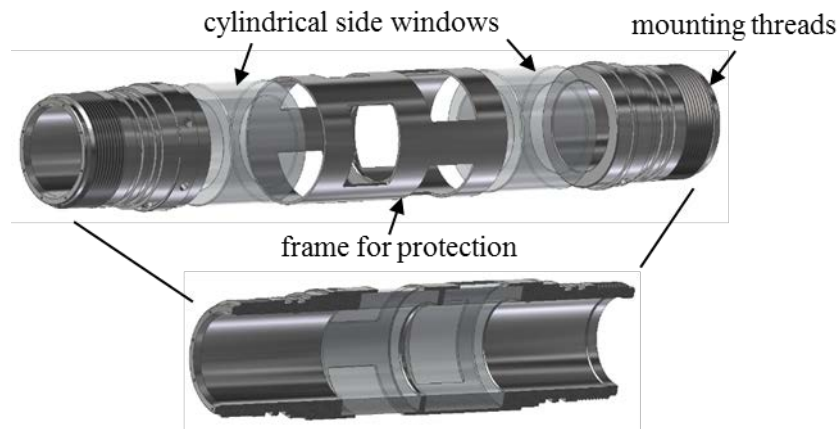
Schematic design of the side windows of GeoKam; top: exploded drawing; bottom: cross section
